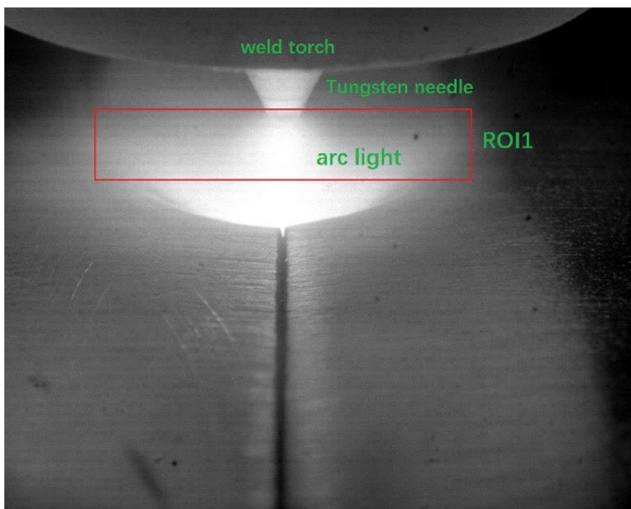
ROI1 in welding image capture by the CMOS camera
